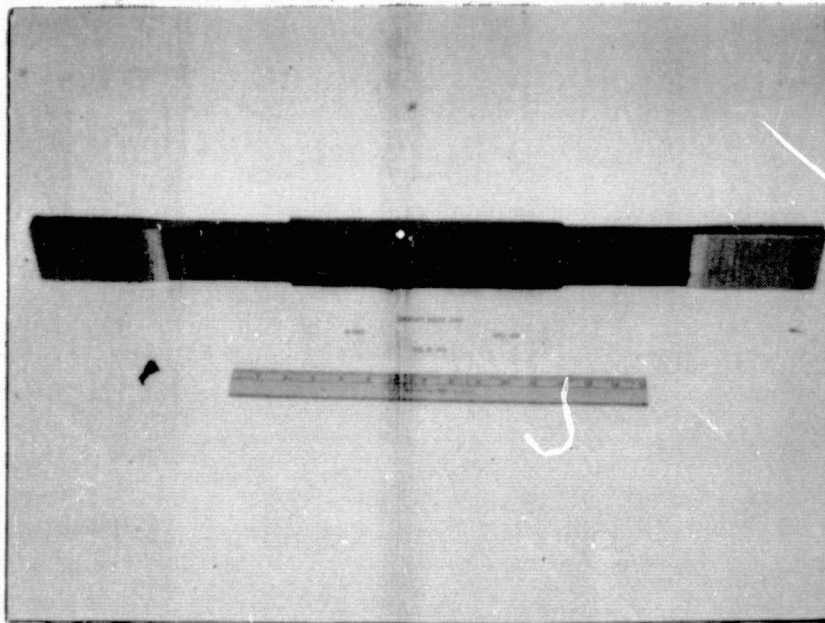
Double-Row Joint Concept Graphite Test Specimen, Drawing 69-60931
